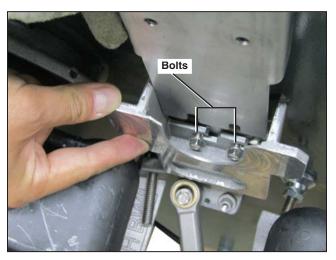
The parking stand extender should rest between the parking stand bolts and parking stand.
